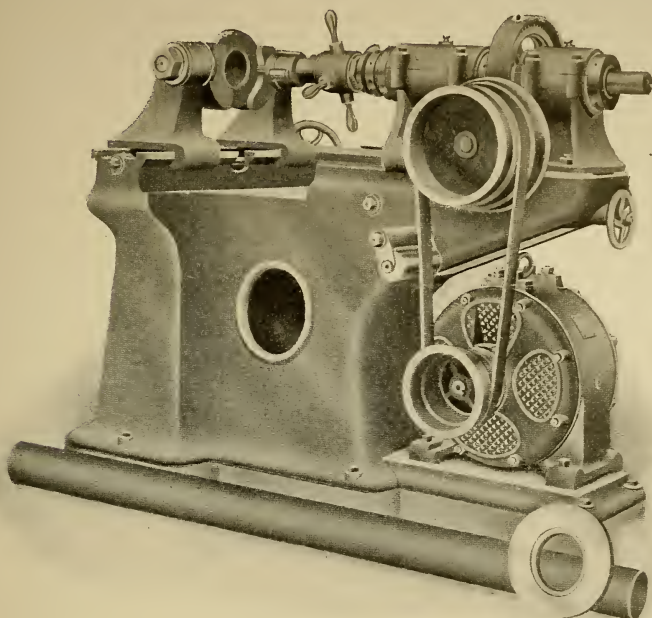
TYPE OF EXPANDING MACHINE WITH MOTOR AS USED FOR JOINTS UP TO $7\frac{1}{2}$ INCHES DIAMETER
